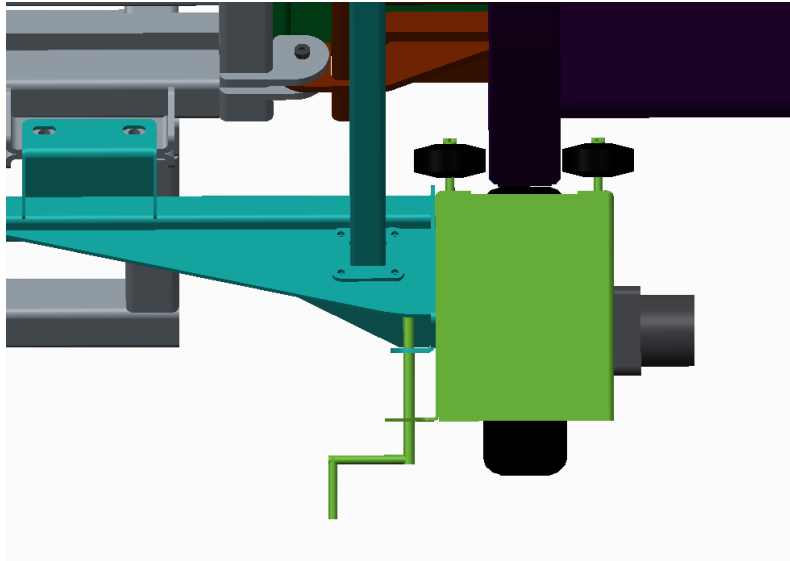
Close up view of hoop drive system rollers and drive wheel
